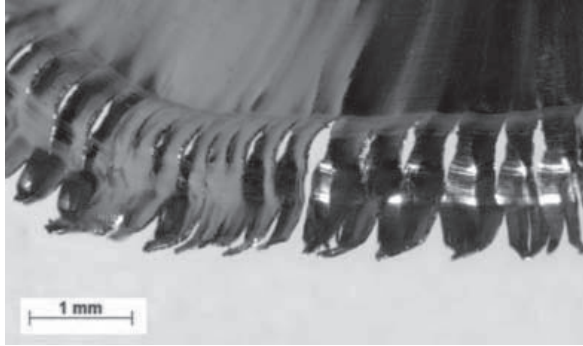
Chip after machining with carbon dioxide cooling for an external insert
